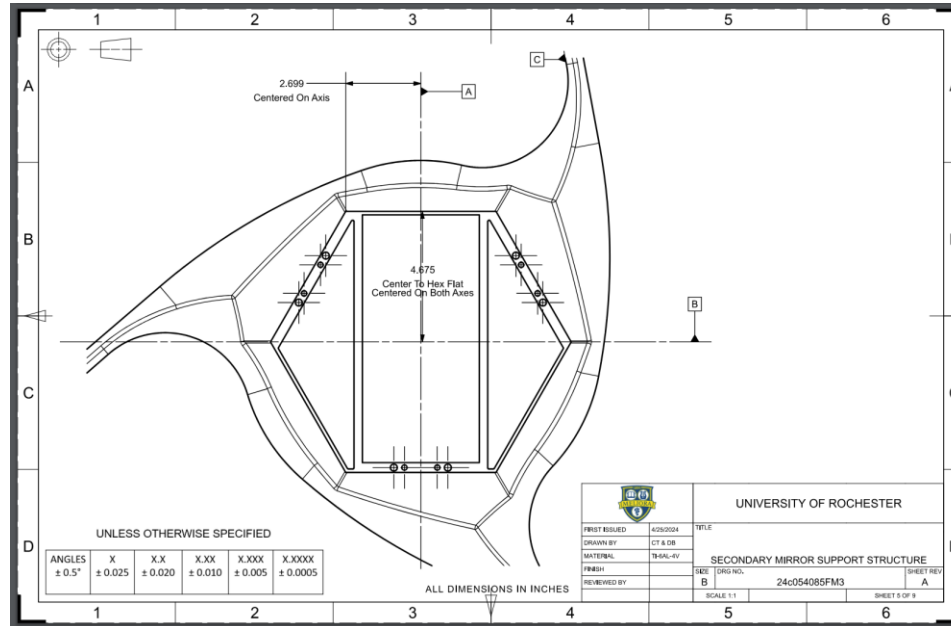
Bottom View Drawing with Inner Hex Dimensions.
